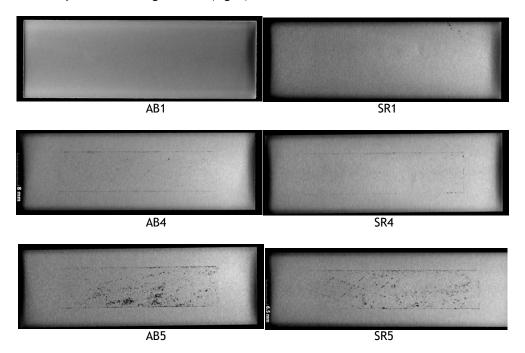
DMLS samples without defects and with artificial defects upon microCT inspection (top view). AB - as-built samples, SR - stress relieved samples
